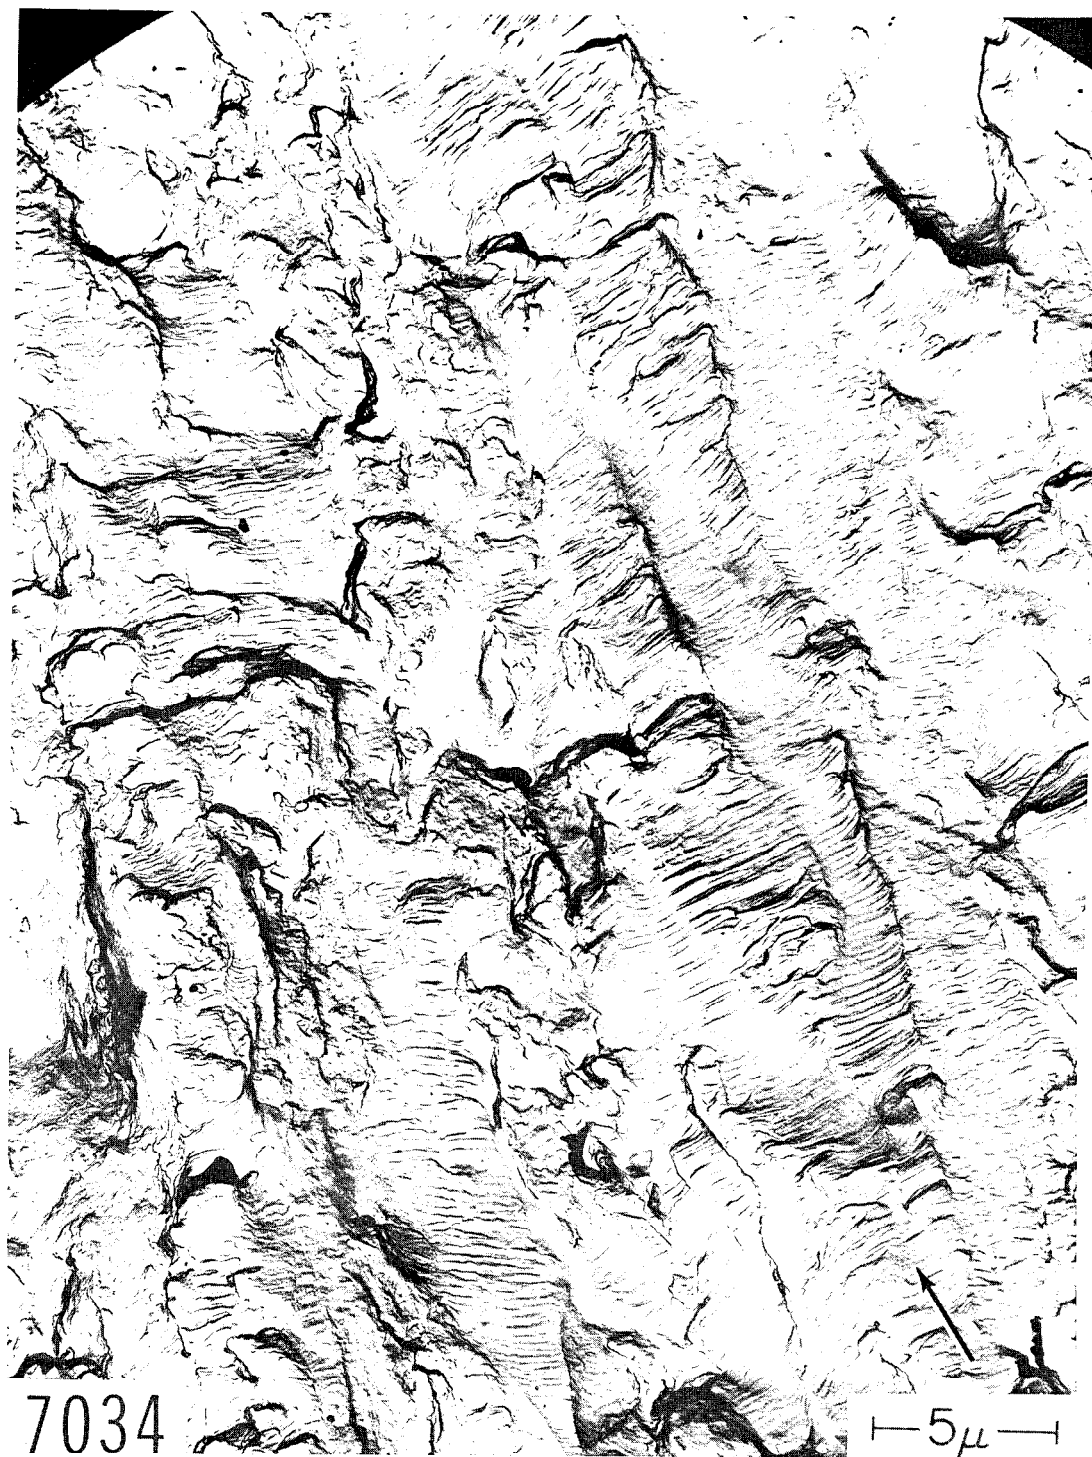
Fatigue markings in the WR crack shown in the specimen in Fig. 63.
